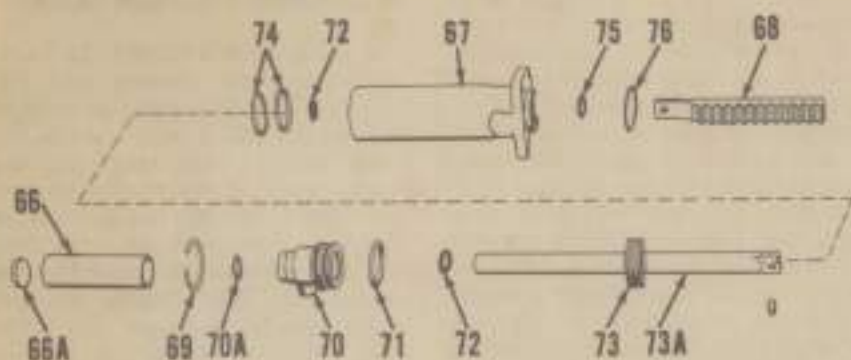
A—Exploded view of the power steering ram (cylinder) typical of type used on D-14 and D-15 non-diesel models.
